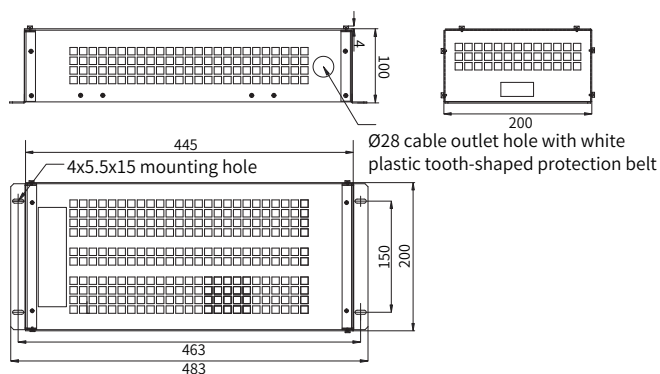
Mounting dimensions of the braking resistor box (unit: mm)
